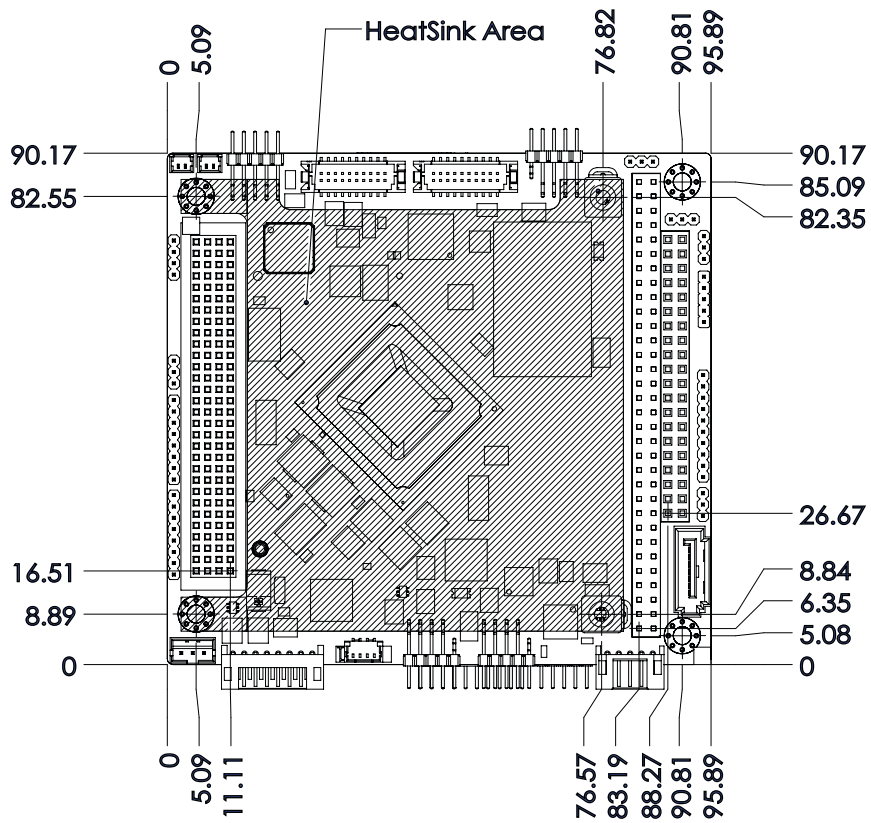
PCM-3365 Mechanical Drawing (Top Side)
